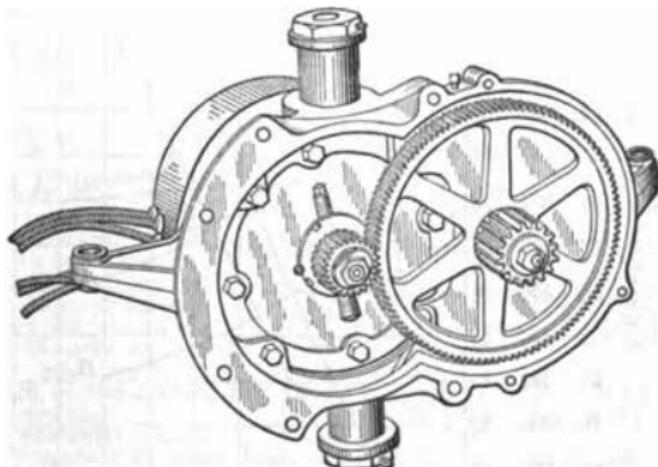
Double spur-gear reduction drive. (Commercial Truck Company.)
